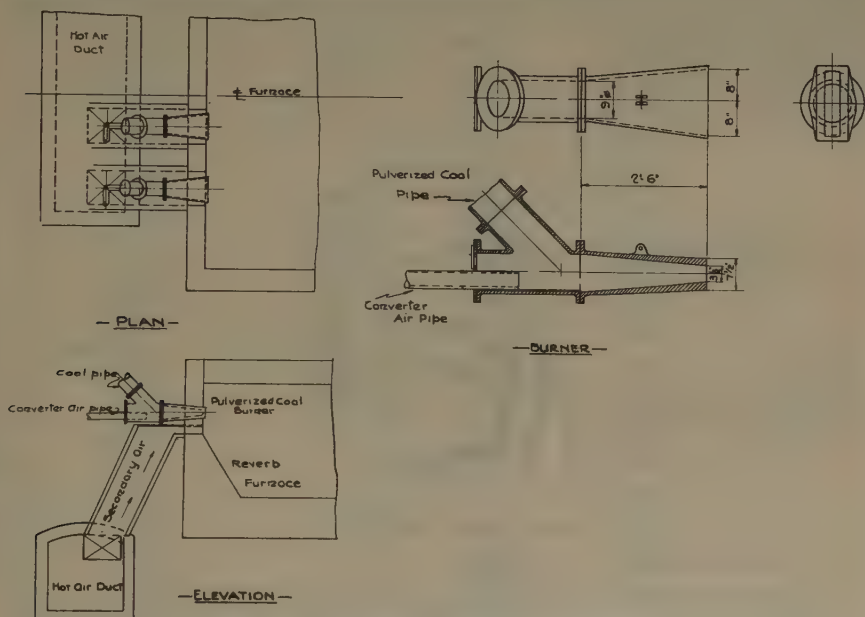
PRESENT BURNER ARRANGEMENT.
